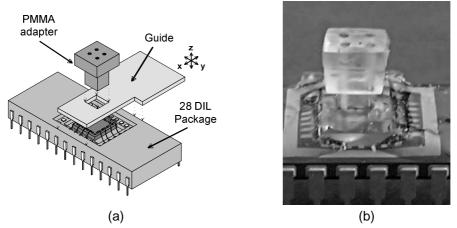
(a) Perspective view illustrating the device assembling and (b) photograph of the final device.
